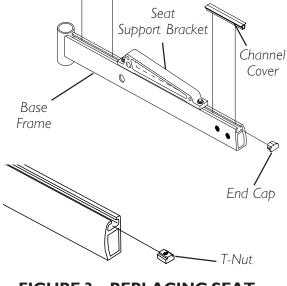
REPLACING SEAT SUPPORT BRACKET T-NUTS NOTE: Before removing seat mounting plates, note the position of the washers.
